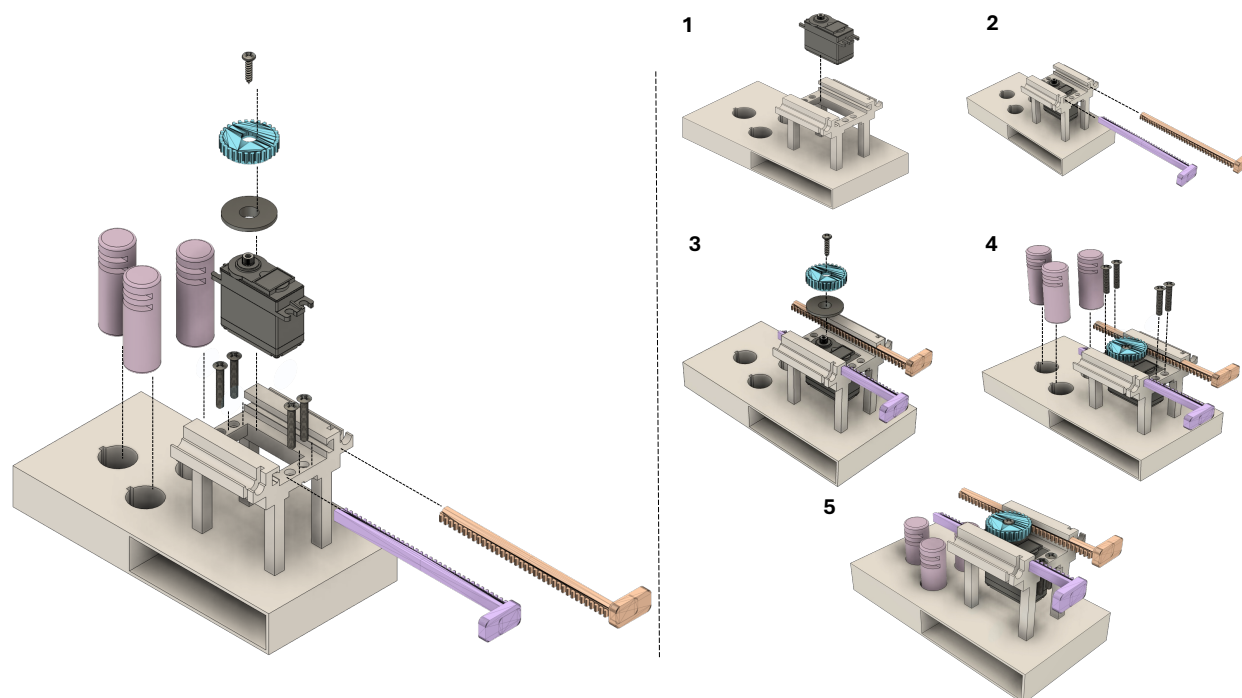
Exploded view of the DIY dual-syringe pump. The pump components, including the 3D-printed chassis, syringe pushers, rack-and-pinion mechanism, servo motor with disc and pinion gear, and mounting hardware. The exploded representation illustrates the spatial relationships between structural, actuation, and fastening elements prior to assembly.
